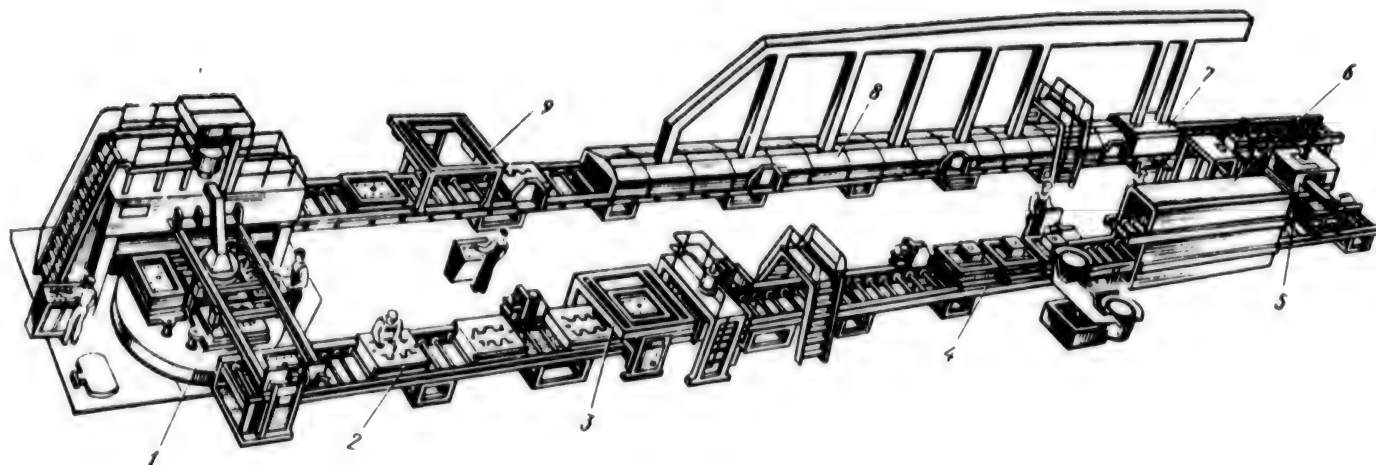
A82M Automated Line for Casting Into Lined Iron Mold
